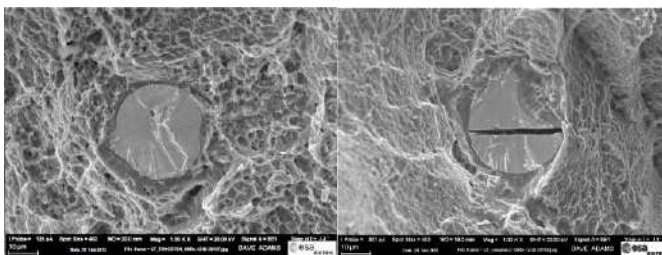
Fractography of tensile specimens (LBMed alloy Ti6-4) showing inclusions from [58].
